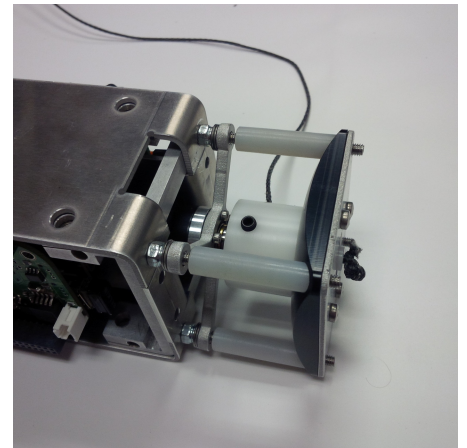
Actuator design with bottom spool cap removed and exposed motor torque sensor. A POM spindle mounted onto the motor axis actuates a Vectran cable. This open construction exposes the wire and spindle, but reduces the cable friction and risk of knots. The design is shown without protective rubber cap.
